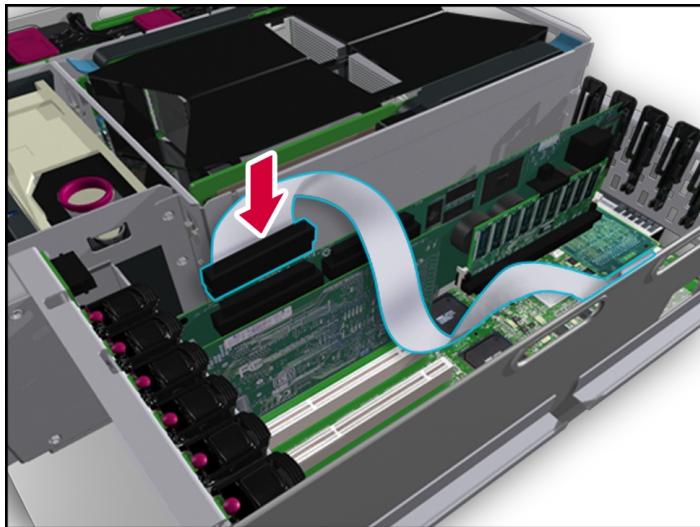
Connecting the Integrated Array Bypass assembly cable
